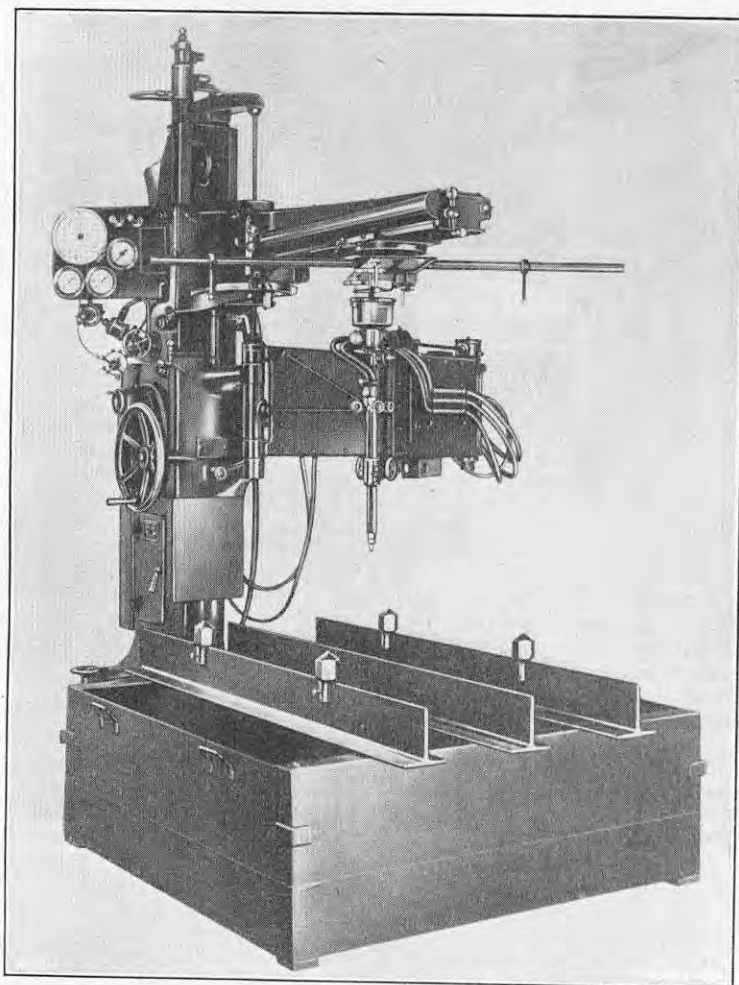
55-IN. UNIVERSAL CUTTING MACHINE; BRITISH OXYGEN CO., LTD.
